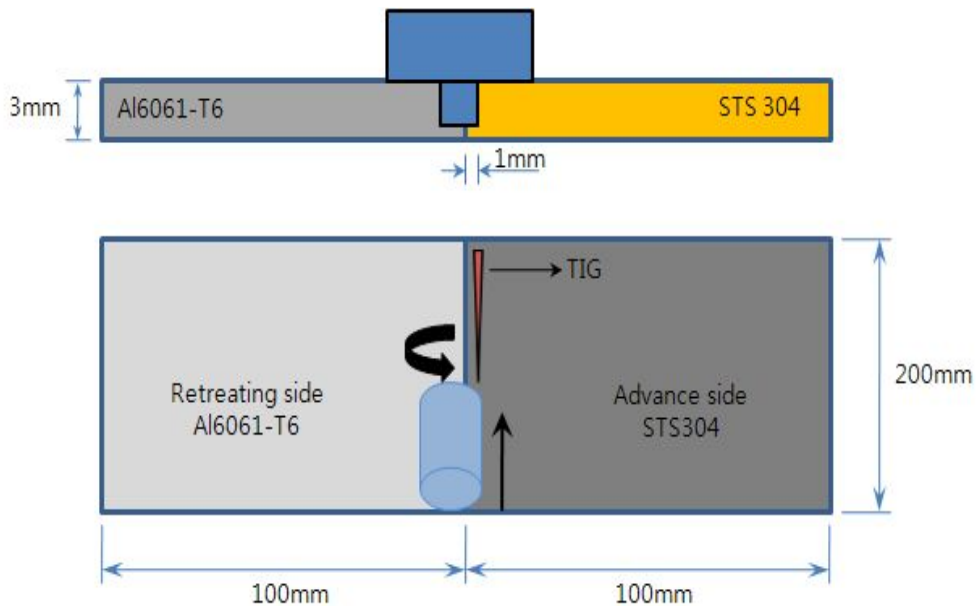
Welding configuration for TIG-FSW
